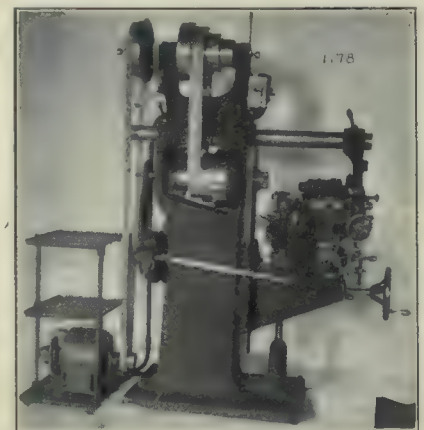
No. 14 Universal Milling Machine Motor Mount.
